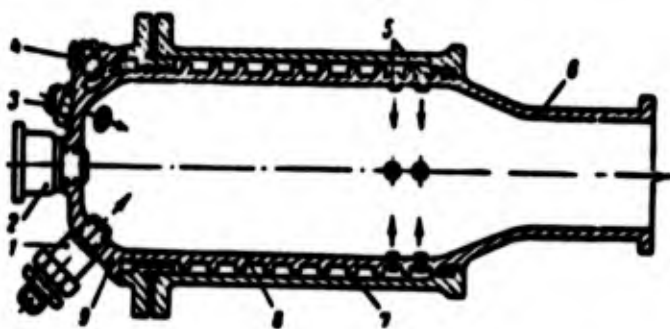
Tricomponent ZhGG: 1 - combustible injector; 2 - igniting device; 3 - oxidizer injector; 4 - pipe connection for supply of water; 5 - water injectors; 6 - outlet duct; 7 - external wall of chamber; 8 - internal wall of chamber; 9 - head.
